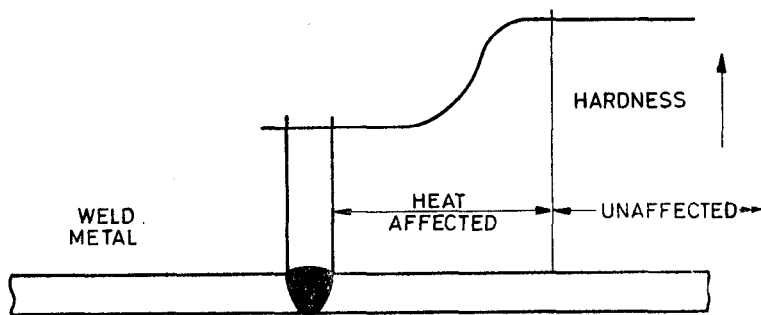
WELD ZONES IN NON-HEAT-TREATABLE ALLOYS
